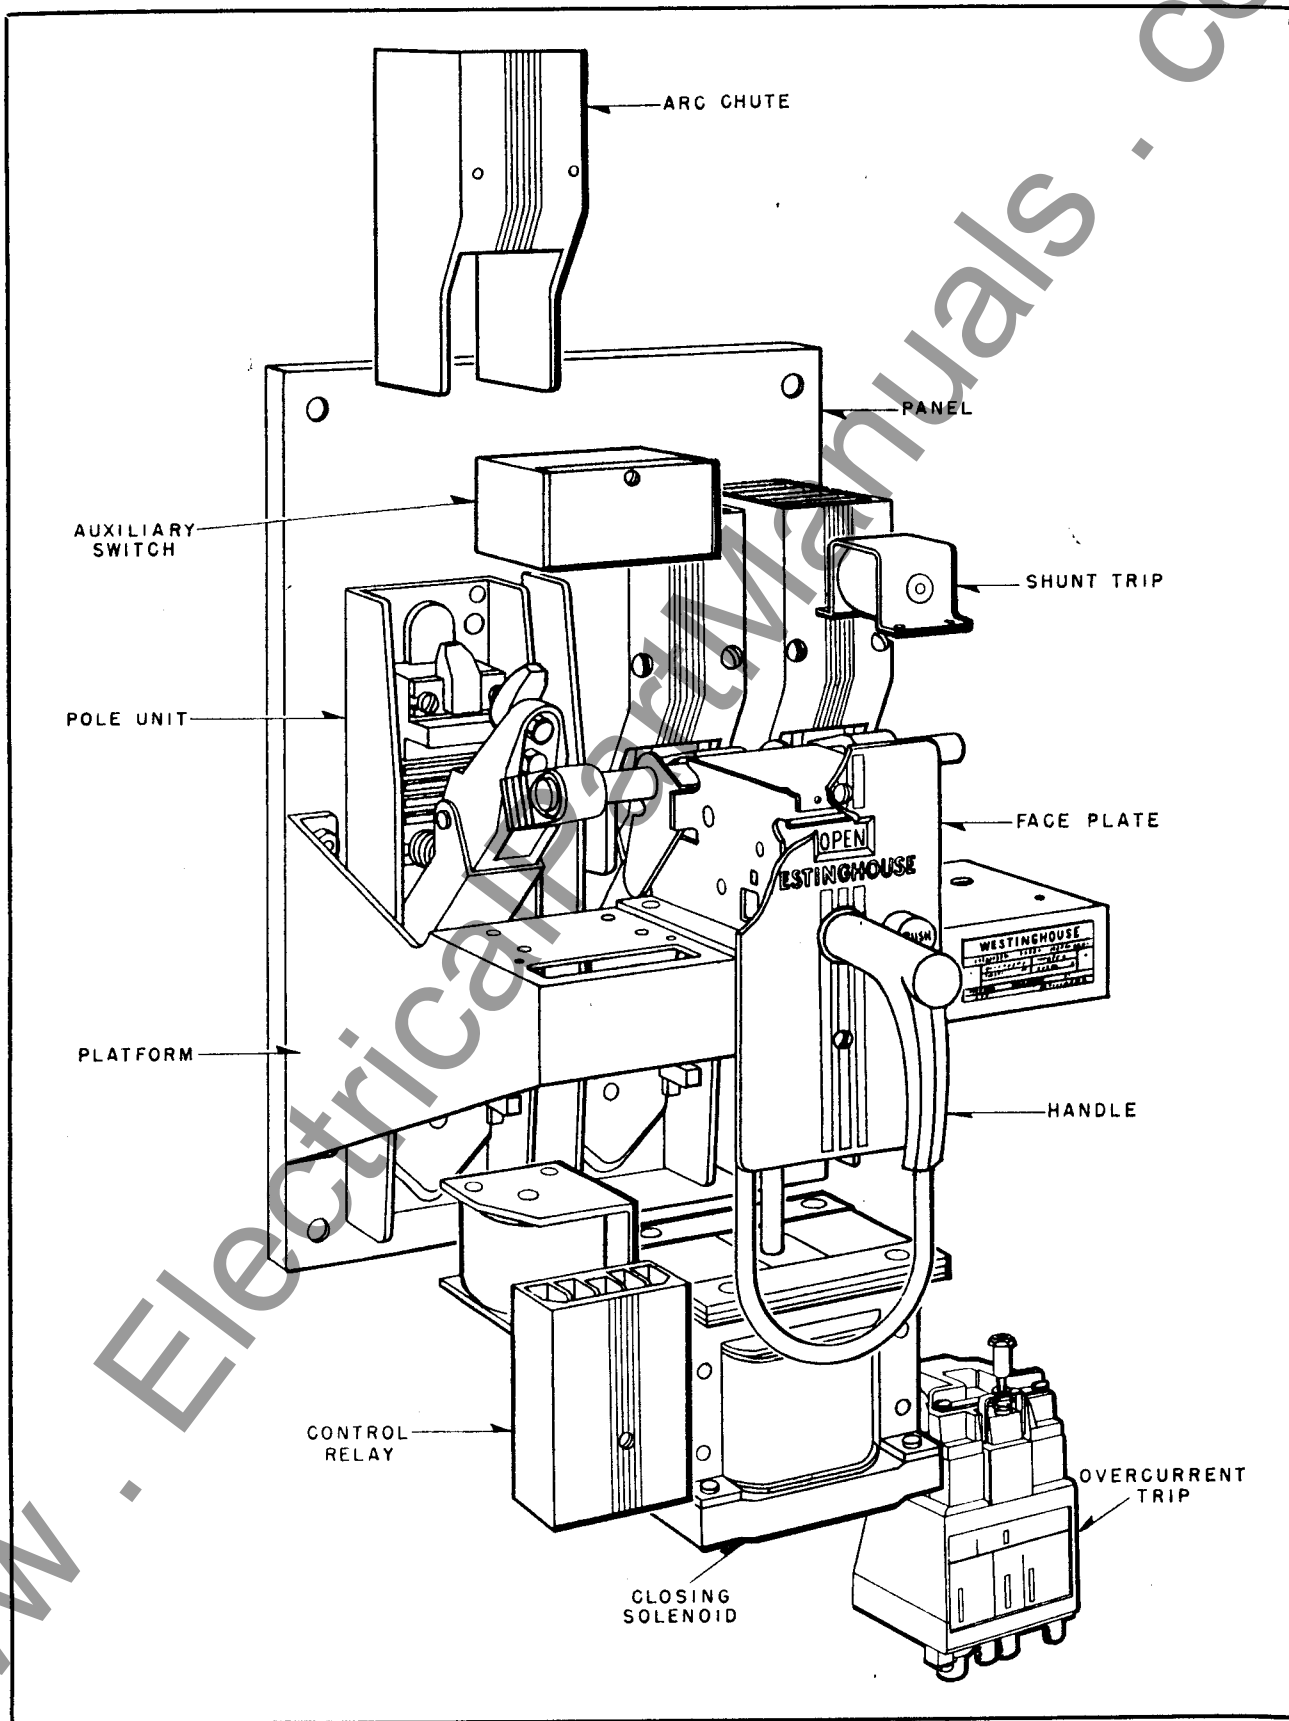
Type "DB" Air Circuit Breaker—Exploded View
